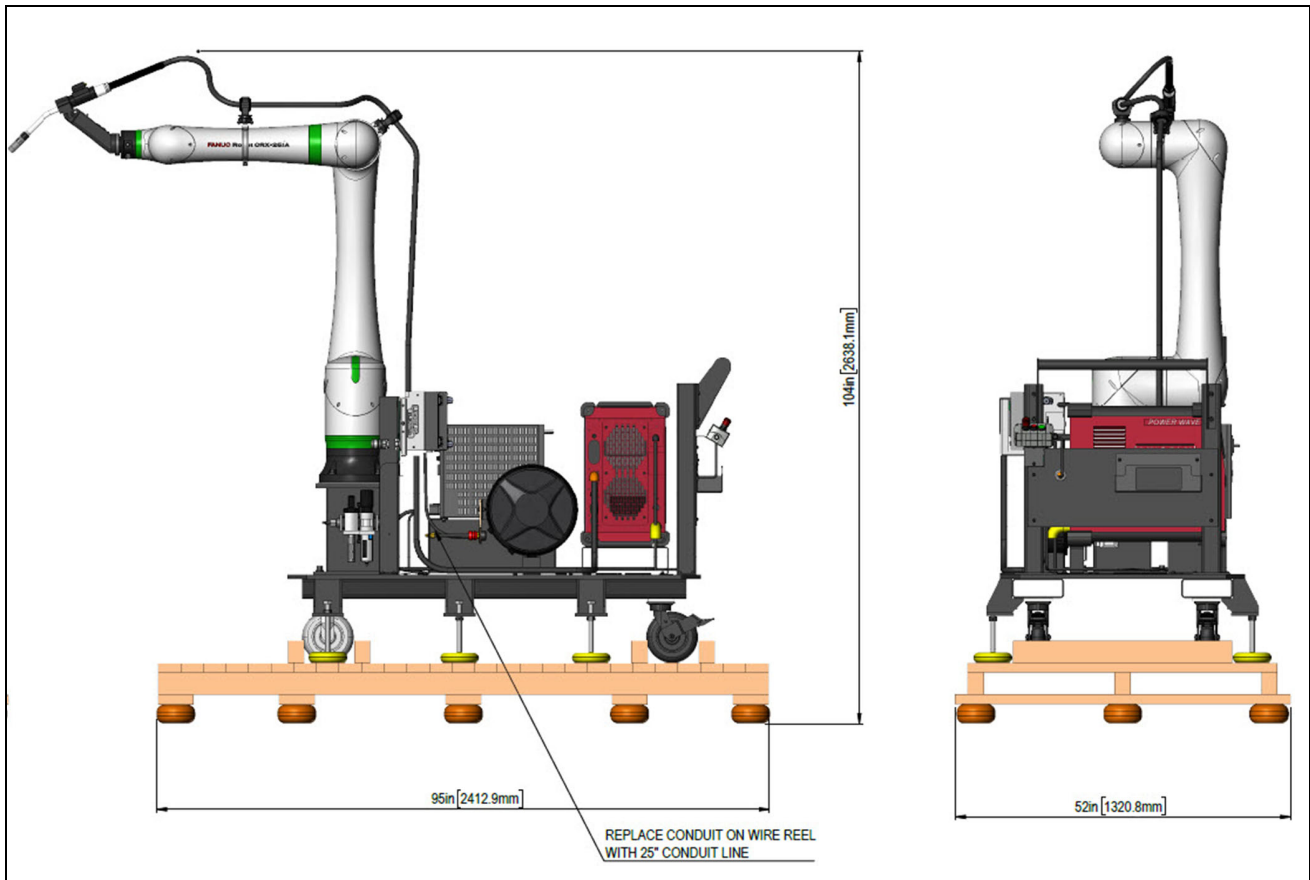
CRX-25iA Cobot Cart Dimensions
